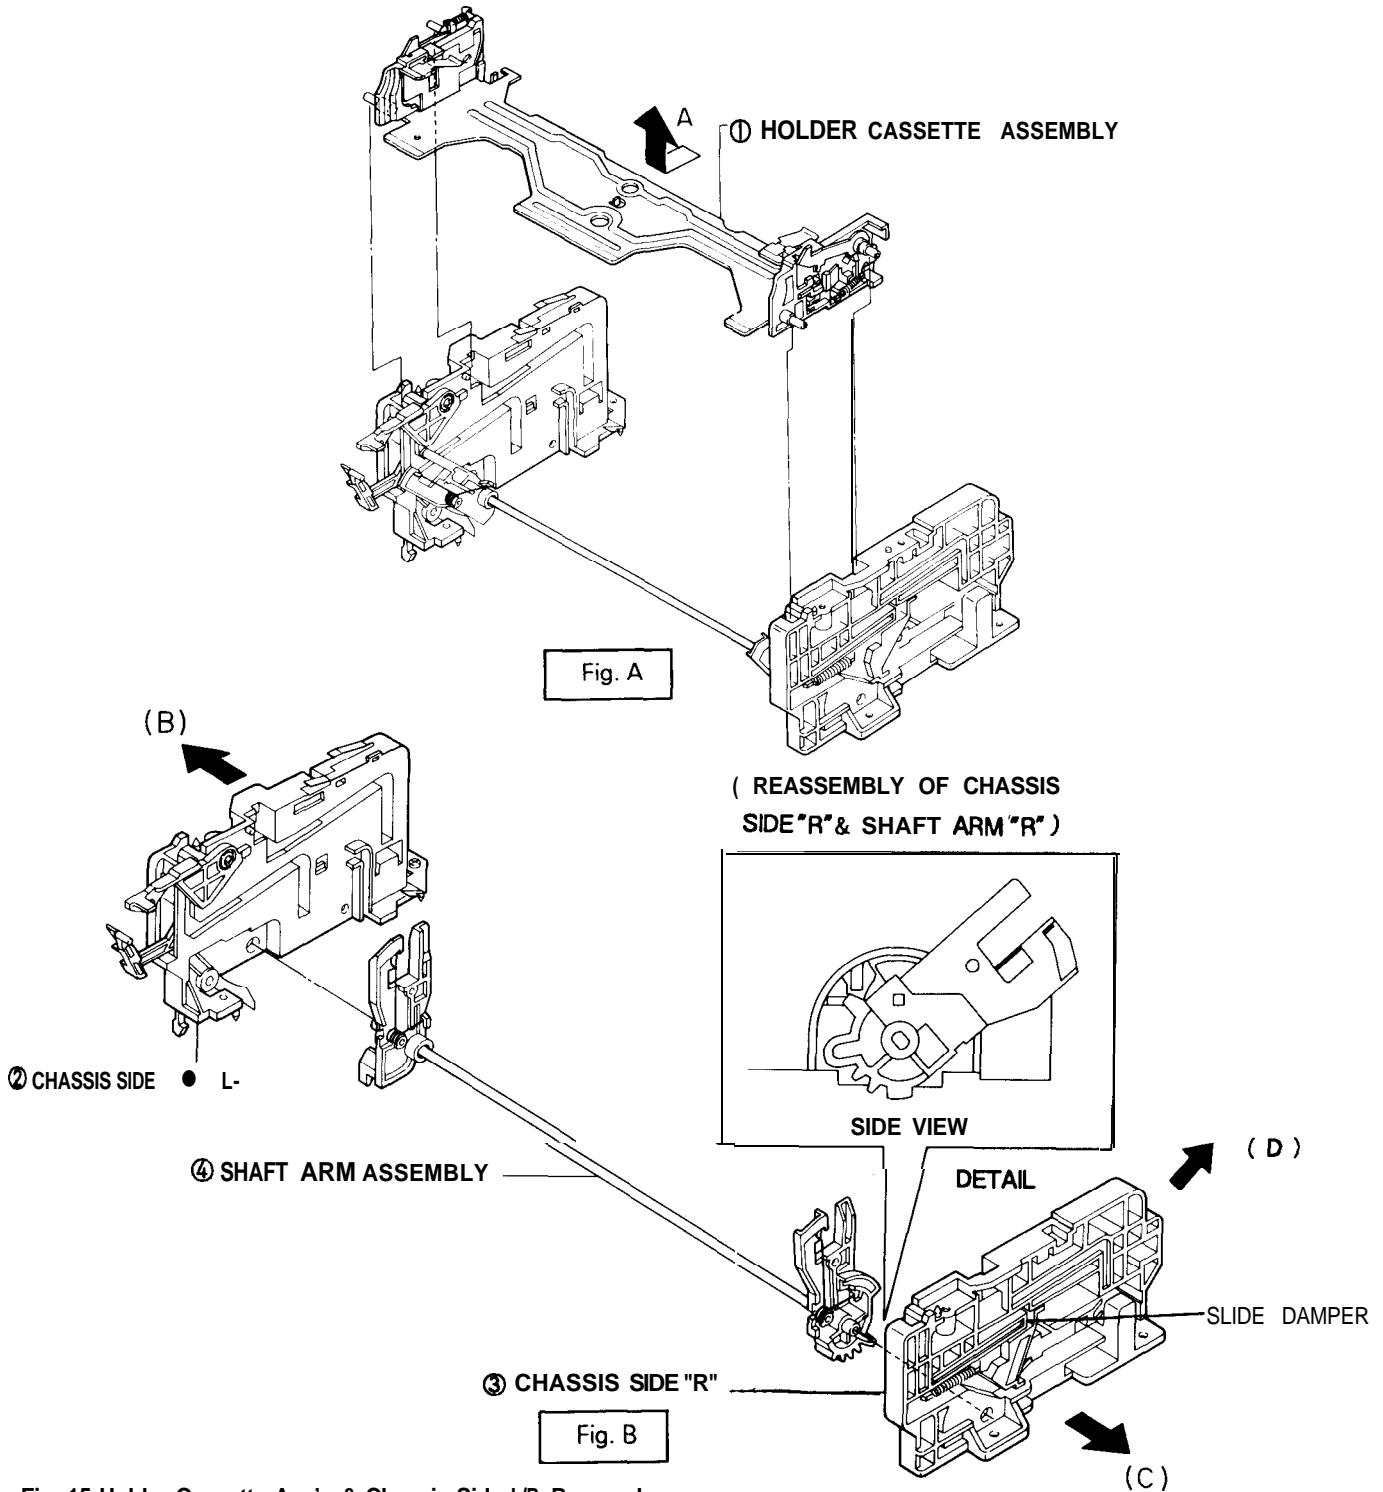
Holder Cassette Ass'y & Chassis Side L/R Removal
